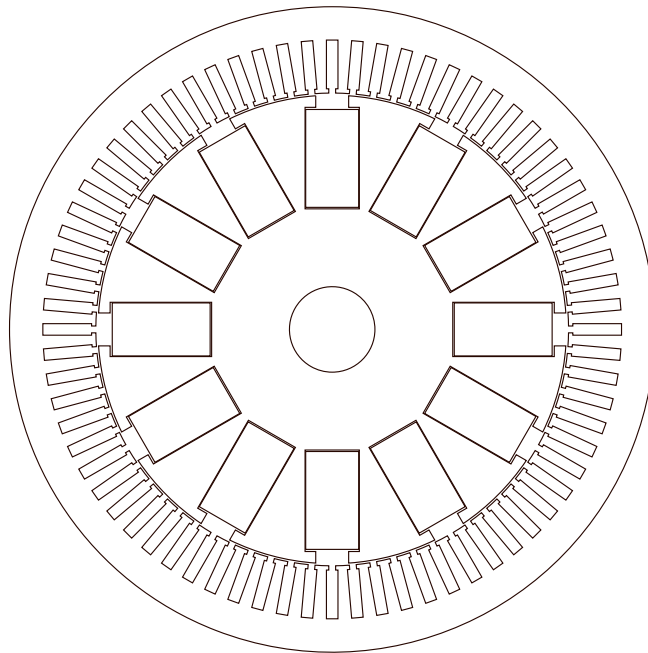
Cross-section of the prototype machine with a spoke IPM rotor.
